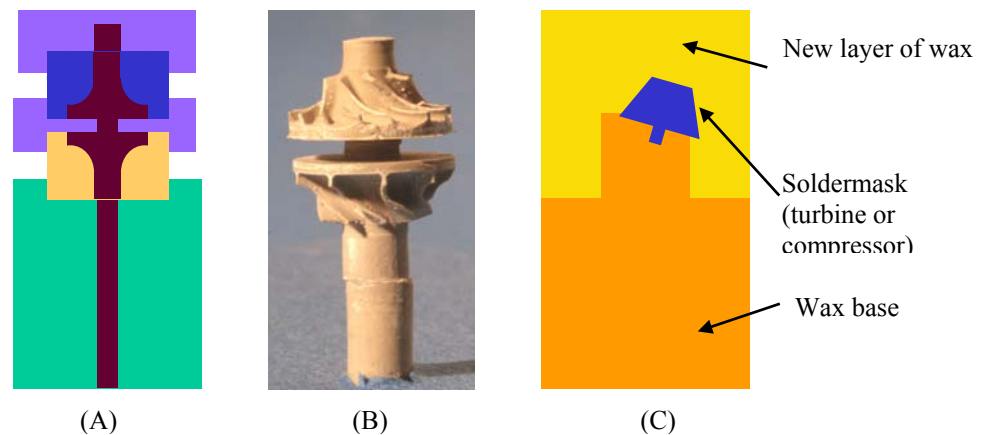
(A) Rotor group mold assembly. (B) As-sintered rotor shows the eccentricity. (C) The schematic shows the drifting of Soldermask during wax casting.
